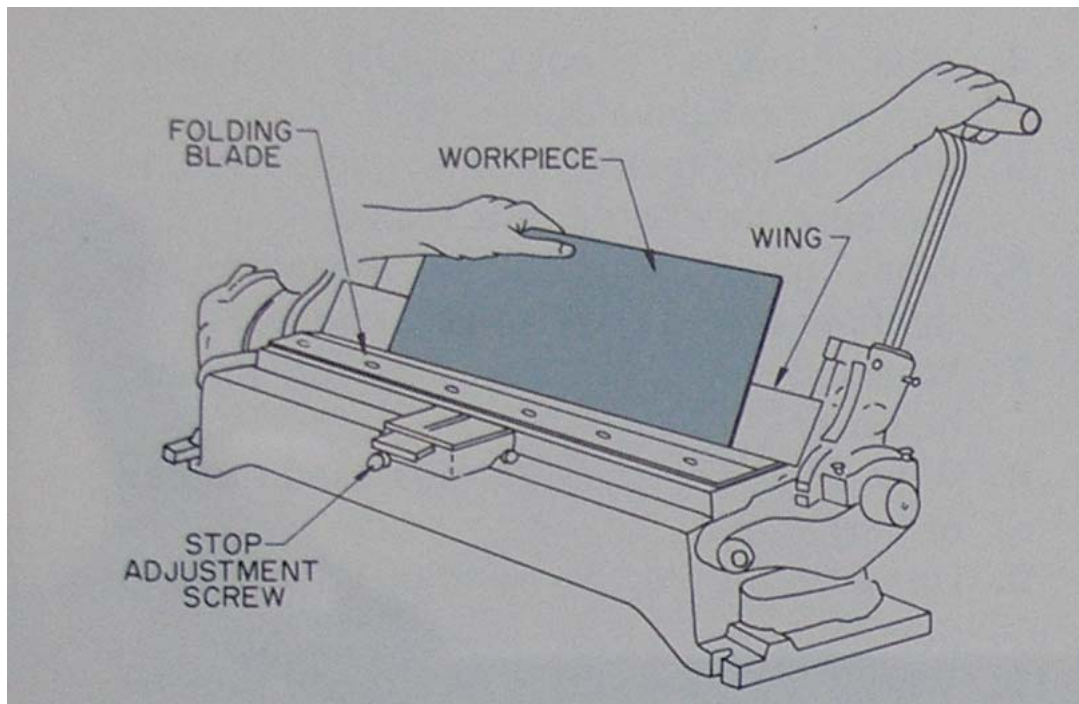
A hand-operated press brake for forming sheet metal.
